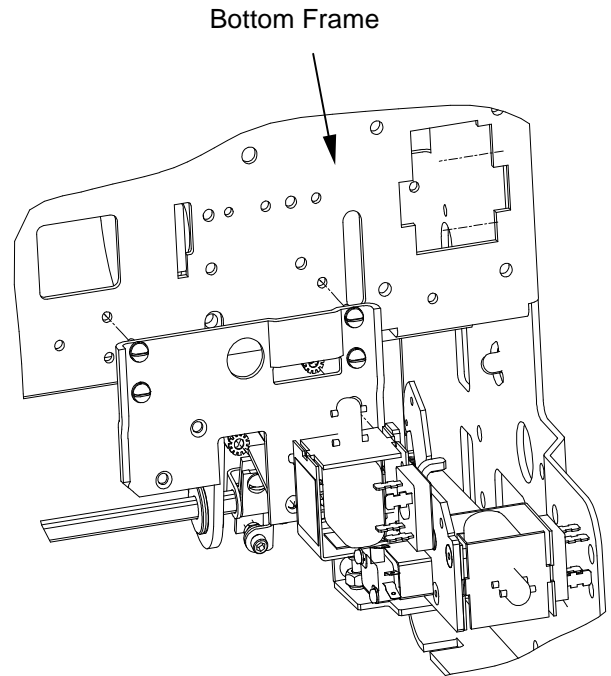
Mounting the Network Interlock assembly to the circuit breaker bottom frame. (Shunt Trip omitted for clarity.)
